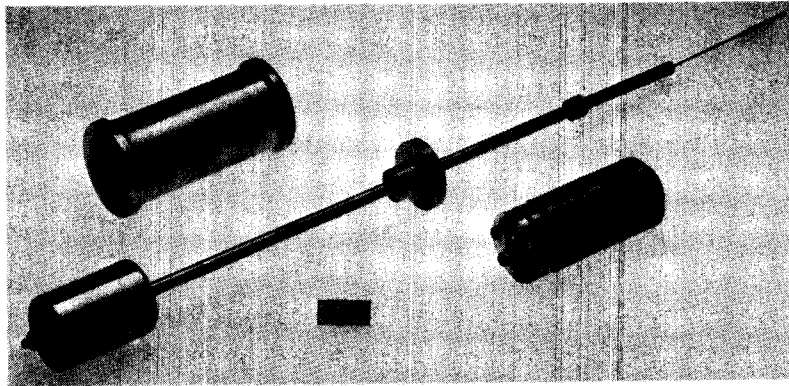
HYDRAULIC LOAD PUMP ROD ASSEMBLY WITH BALANCE PISTON.
